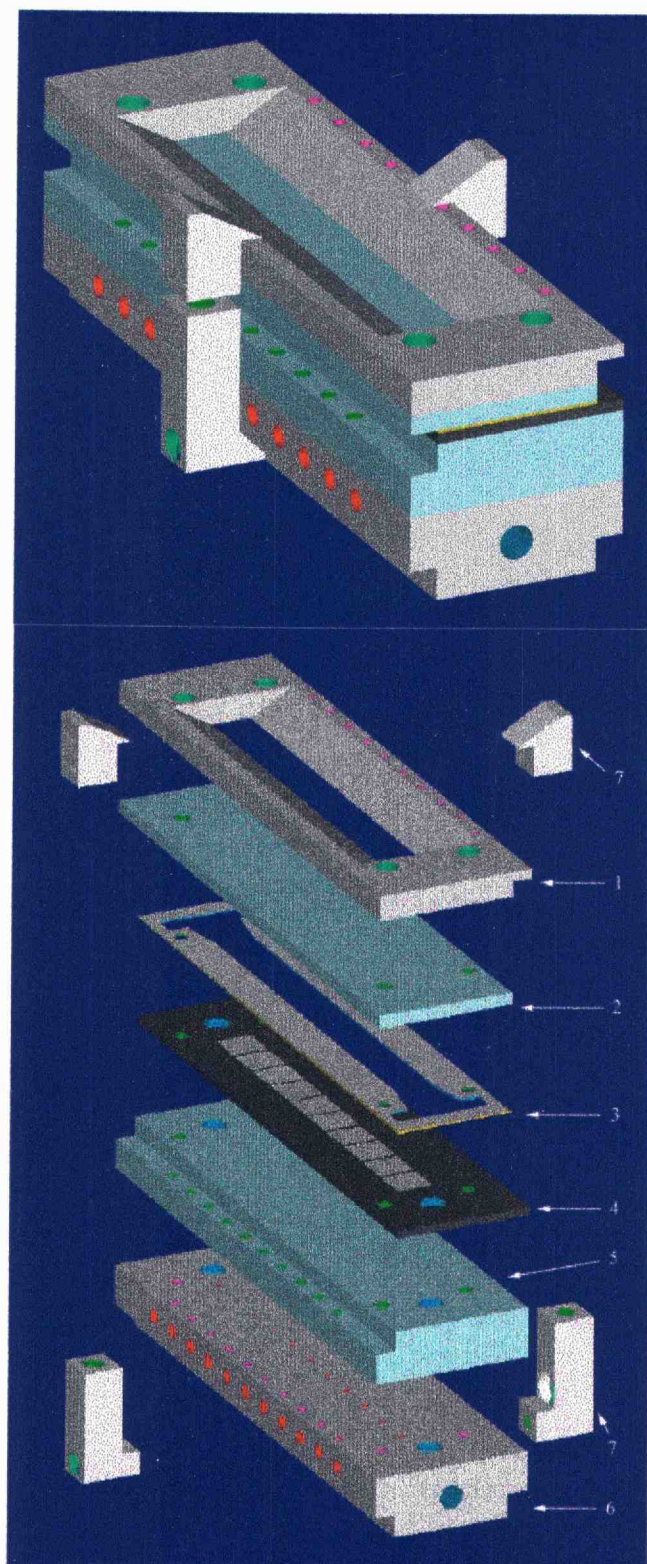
Test section (top - assembled; bottom - disassembled)
